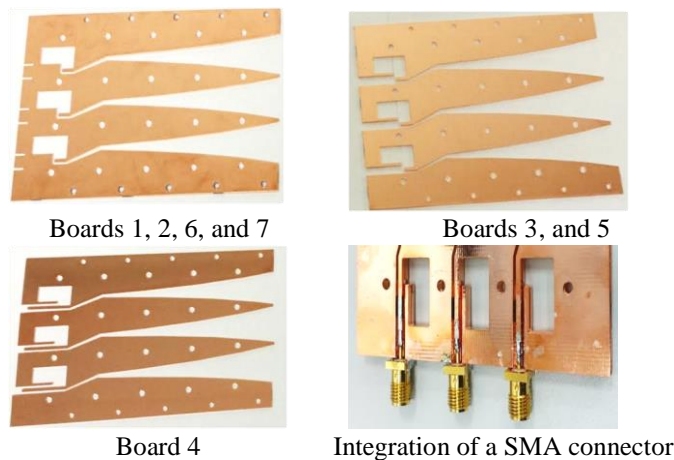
Illustration of the assembly for the array row: Boards 1,2,6, and 7 form the bottom and top layers. Boards 3 and 5 are used to form the sidewall of the rectangular coaxial line. Board 4 is the center layer and is used to solder the inner conductor of the coaxial feed line.
